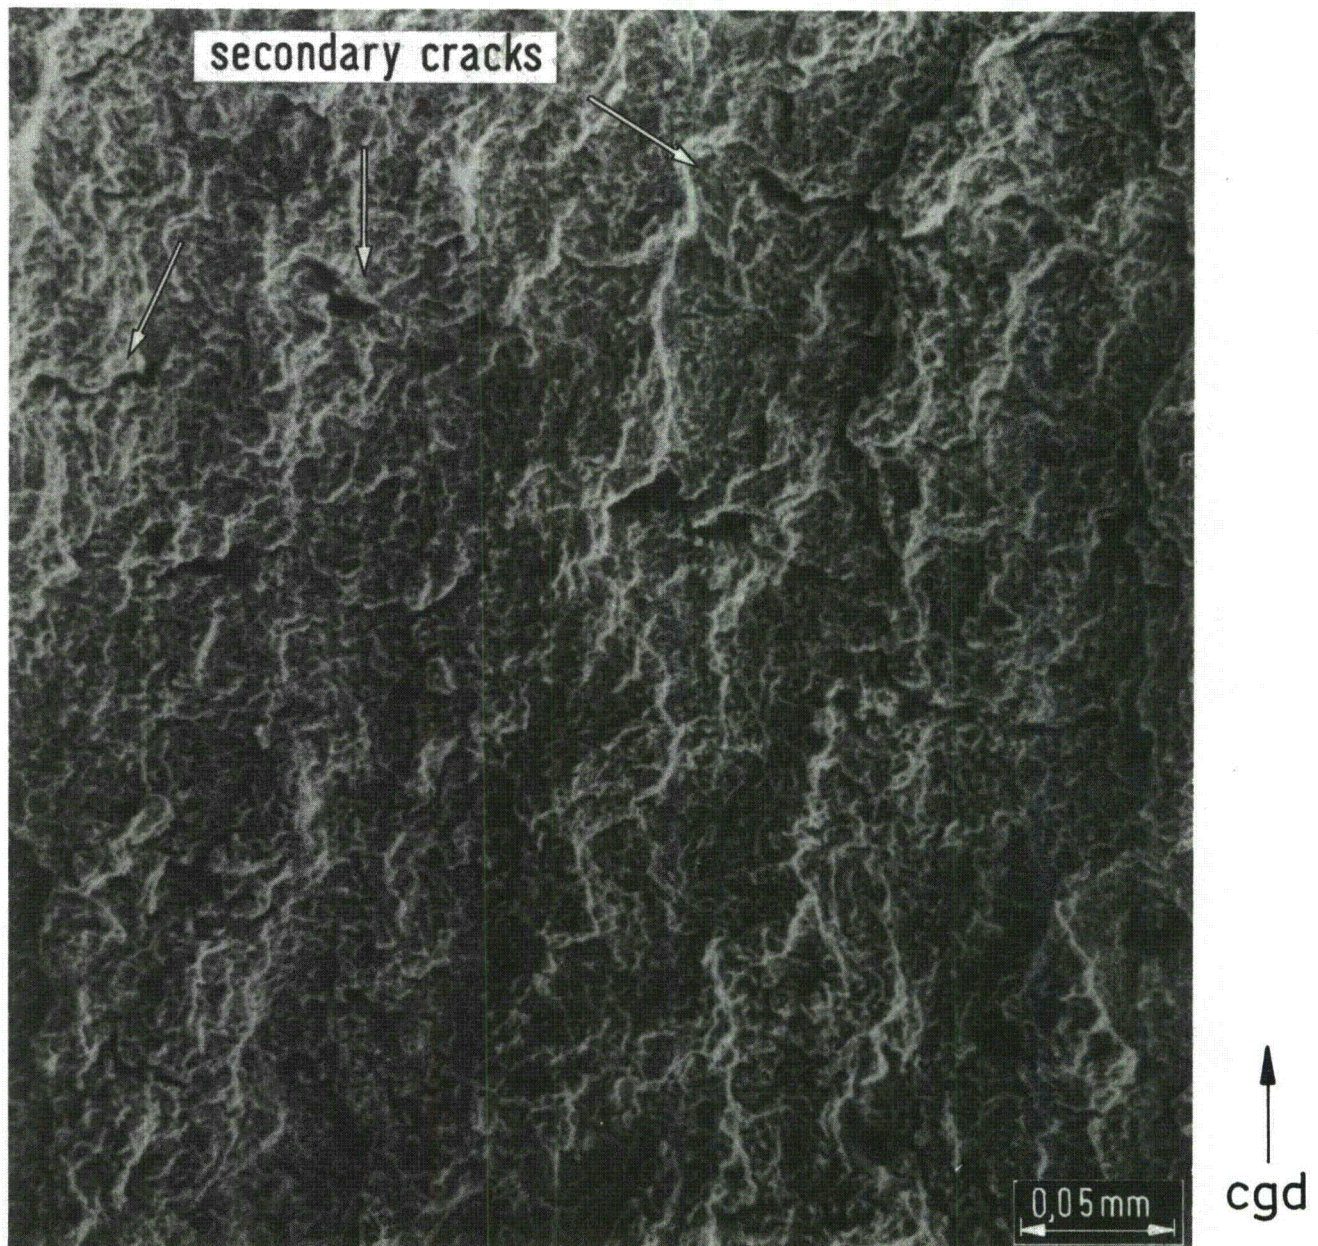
Fracture surface with secondary cracking transverse to main direction of crack growth
